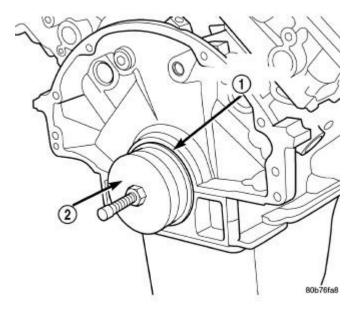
Crankshaft Rear Oil Seal Removal Courtesy of CHRYSLER LLC
